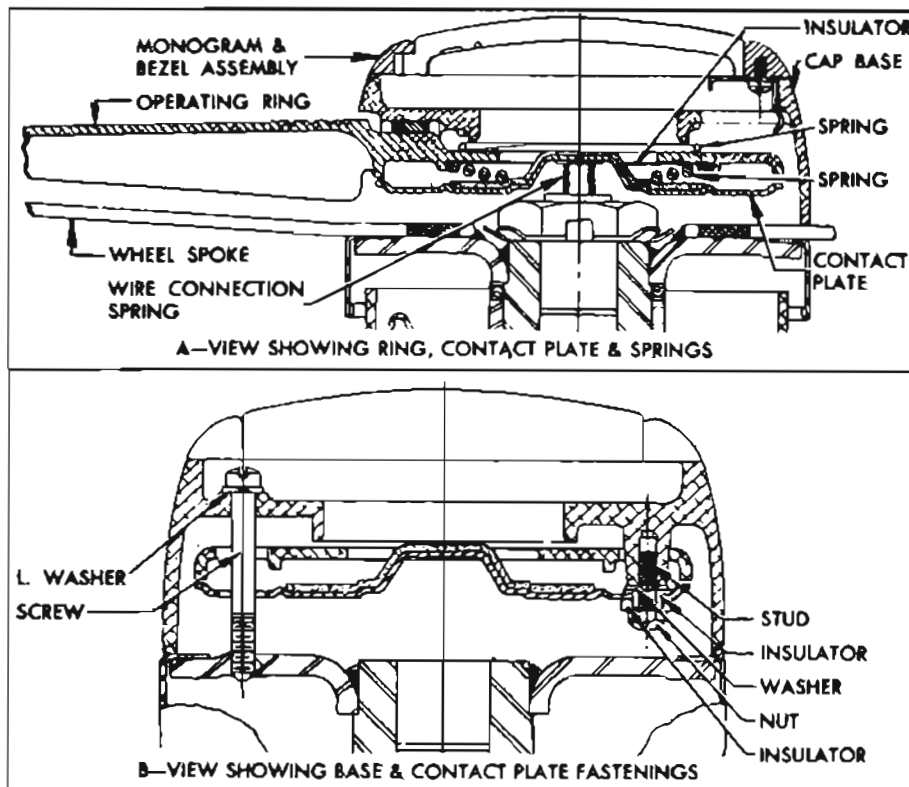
Horn Button in Flexible Spoke Steering Wheel—Sectional View
